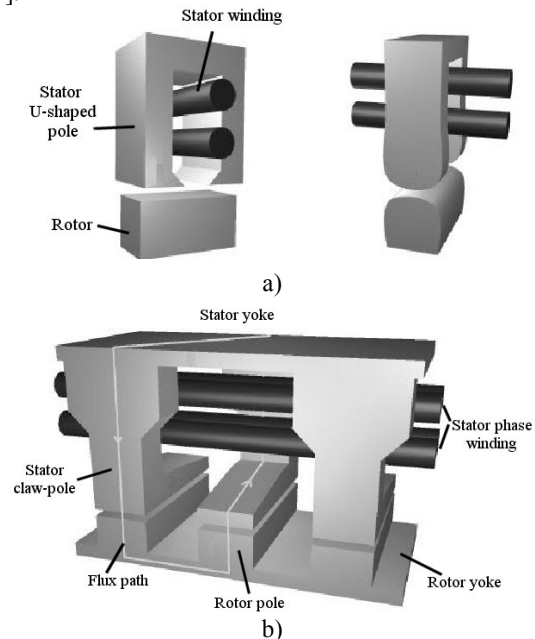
Basic structure of a TFR machine: a) with U-shaped poles, b) with claw-poles [6]
